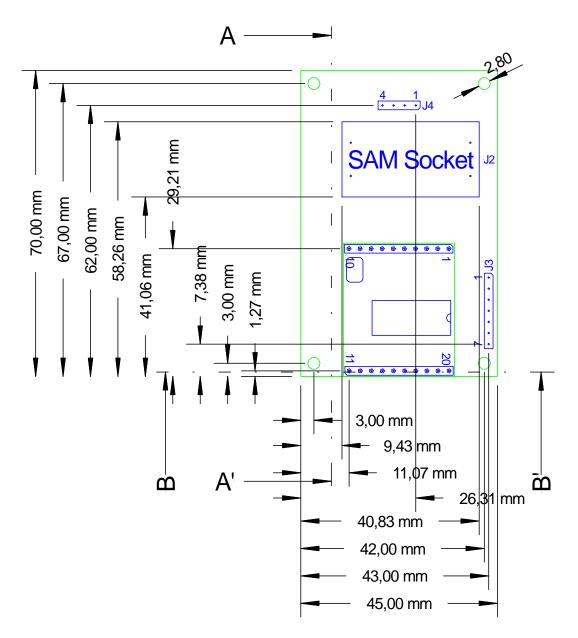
5553 Reader RS232 Compact Multi ISO - Top View
